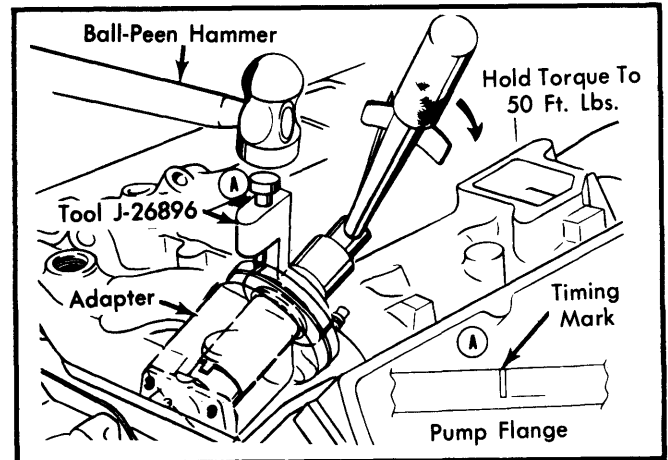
Holding Torque on Adapter While Marking Timing Marks
